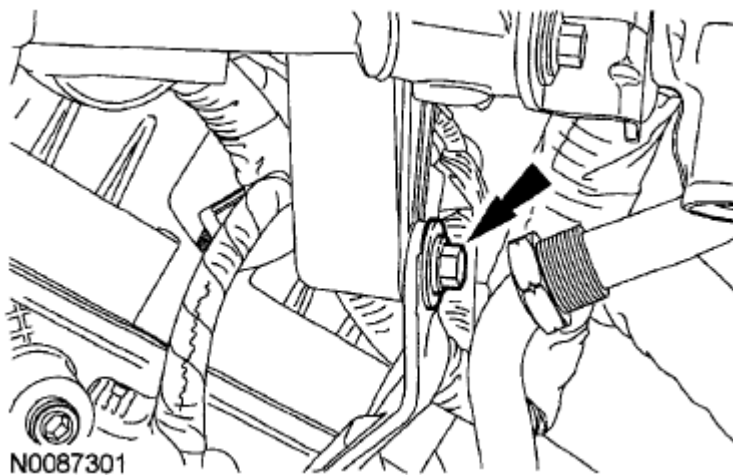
Locating Upper Intake Manifold Bracket Lower Bolt
